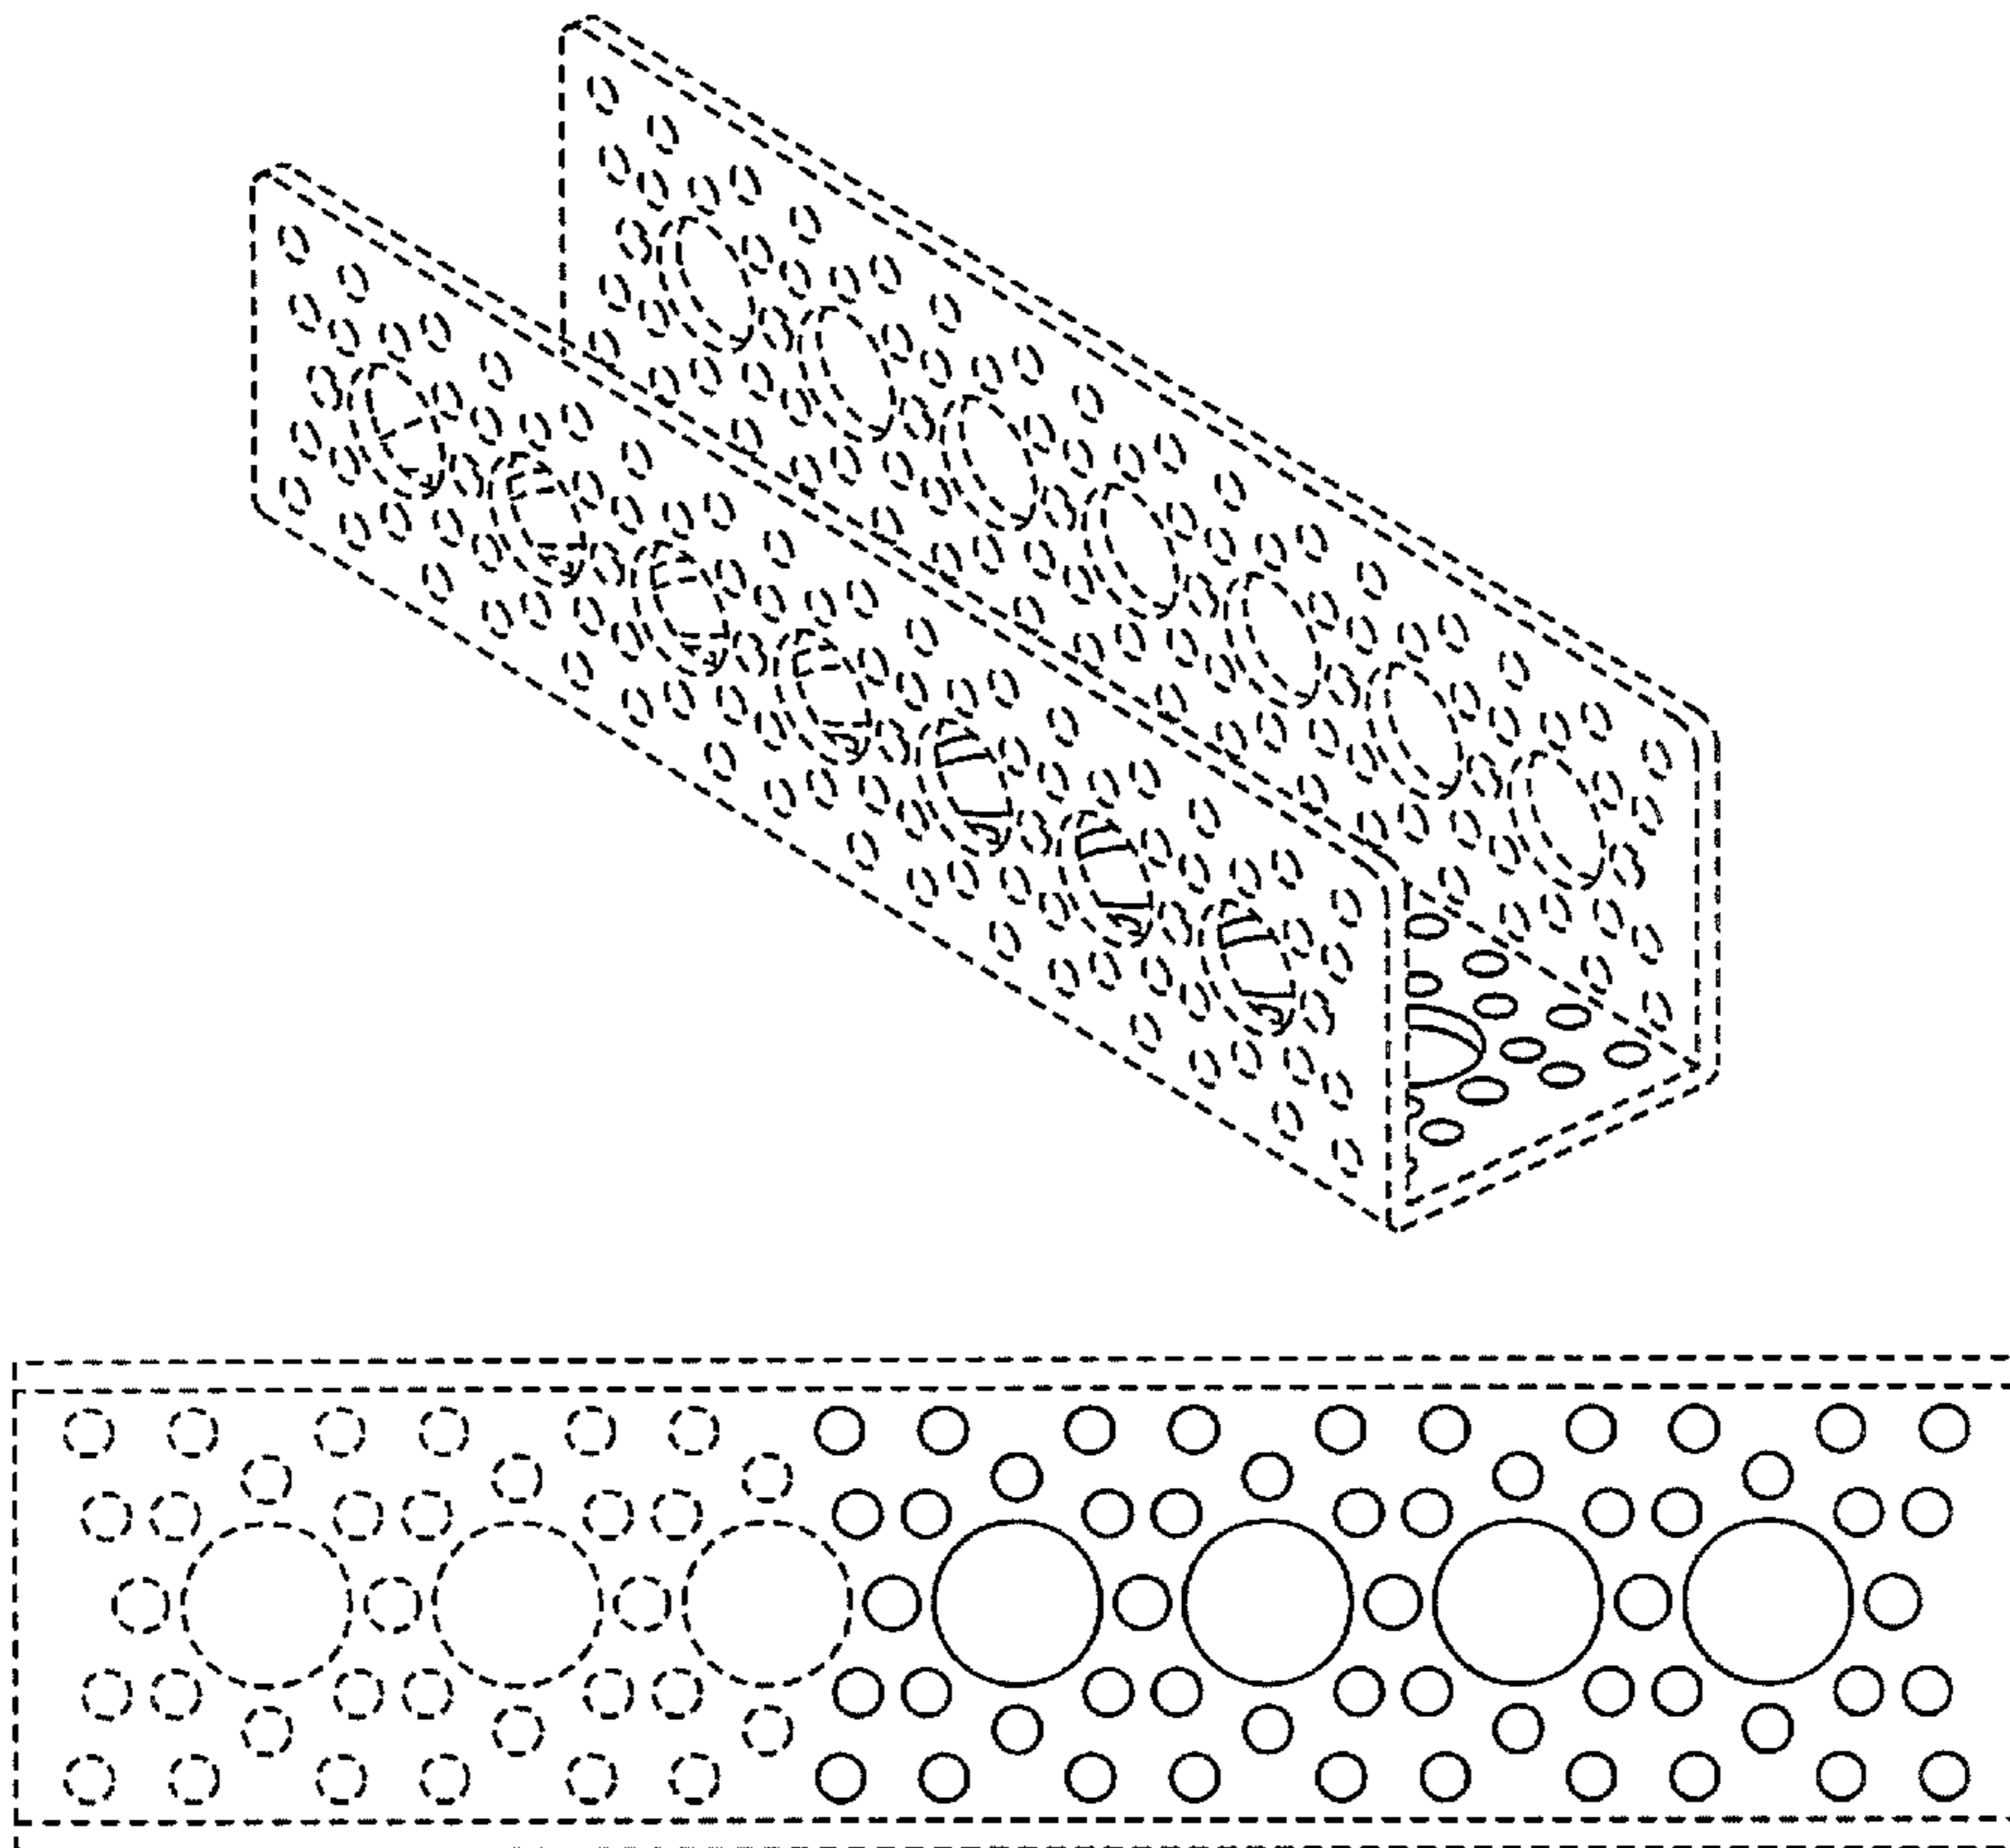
is a perspective view of an embodiment of the channel hole pattern.
